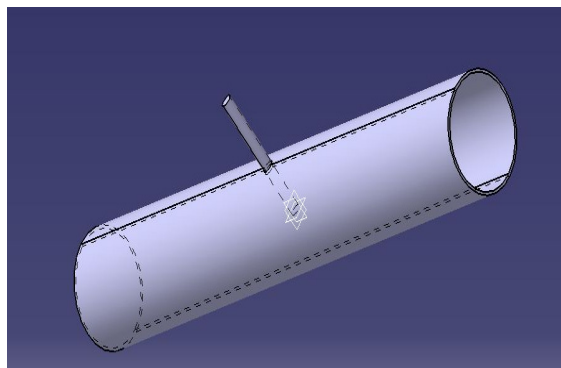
3D Modeling of Exhaust Tail Pipe with vertical positioning of injector
